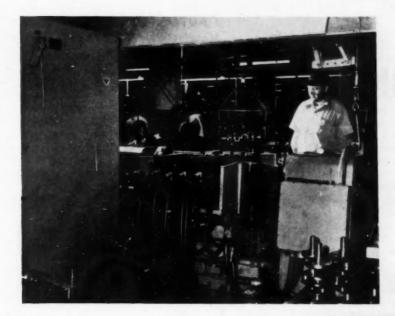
lilustration at far left shows setup for flame hardening bearings of a crankshaft for an eight-cylinder truck engine in a Dodge piant. Four burner blocks at left center are in position to heat the four main bearing journals at one time, as the shaft is rotated.
